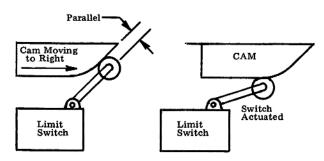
Cam Angle. Leading Edge of Cam Should be Parallel to Switch Lever Arm.
